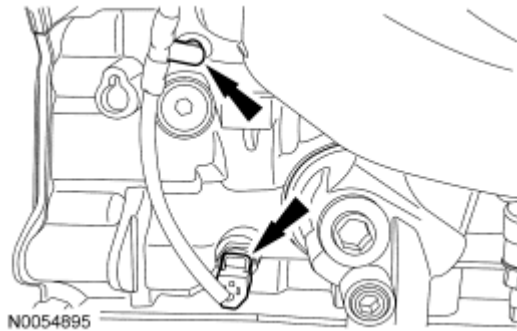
Locating Engine Oil Pressure (EOP) Switch Electrical Connector & Wiring Harness Pin-Type Retainer
